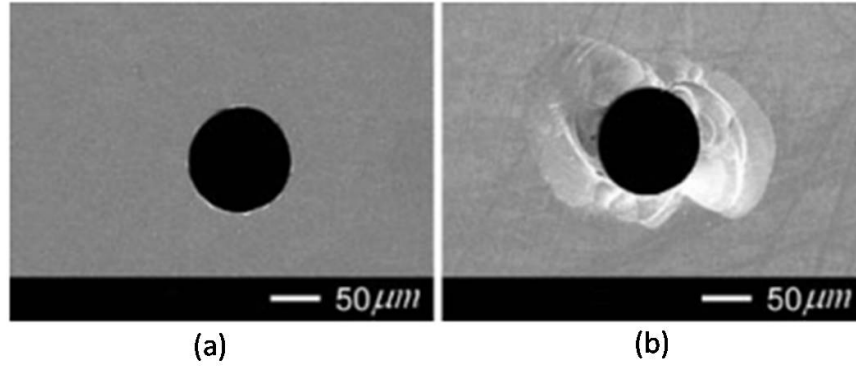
Shapes of drilled hole (a) Hole entrance (b) Hole exit
